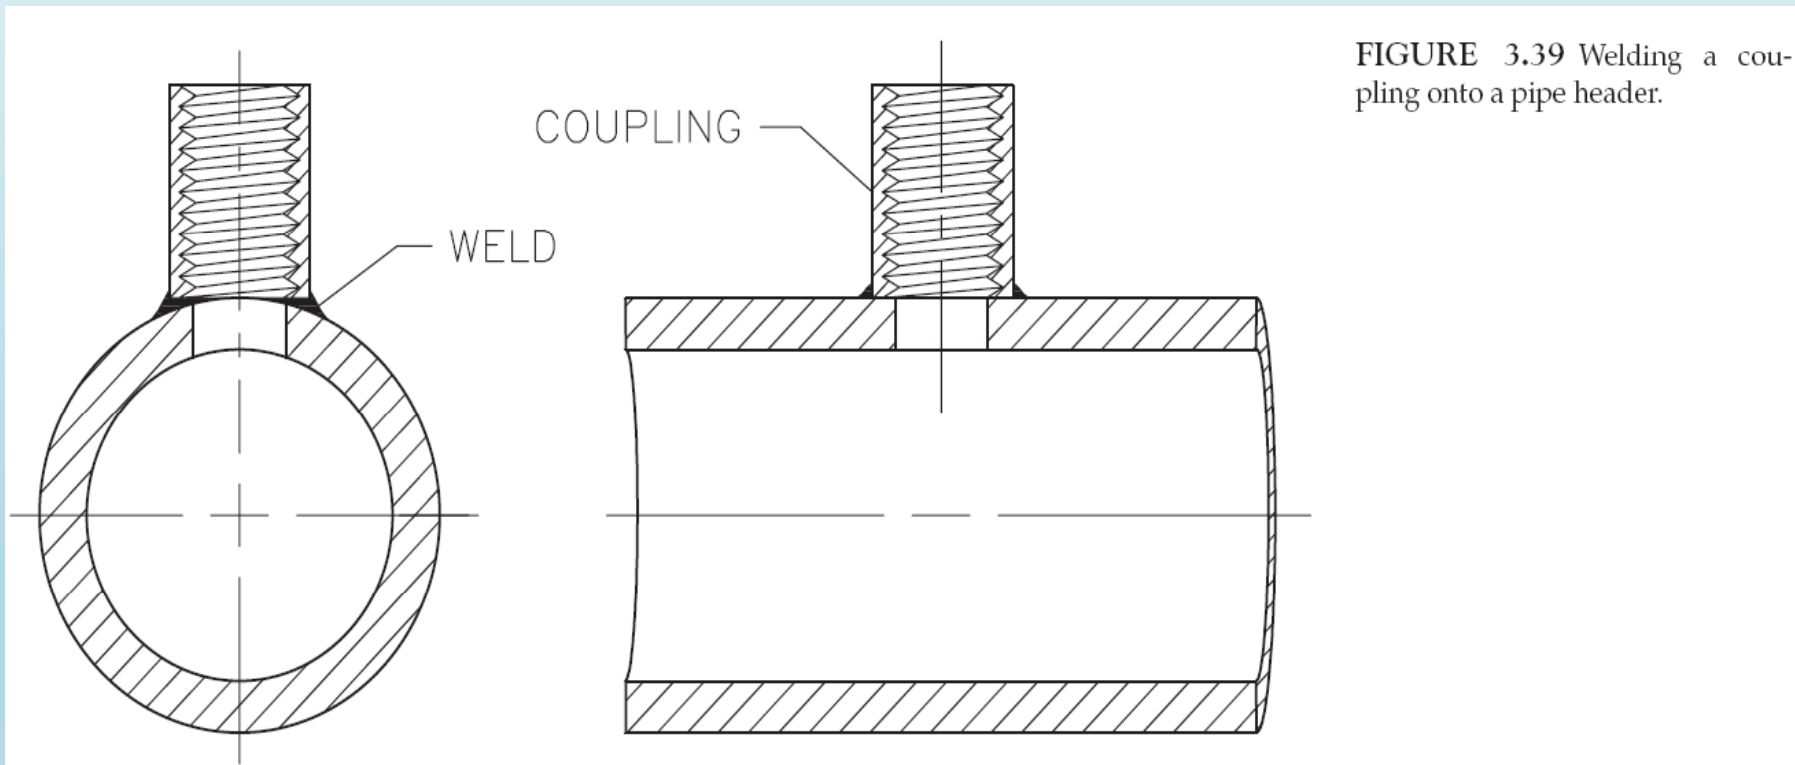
Welding a coupling onto a pipe header.
